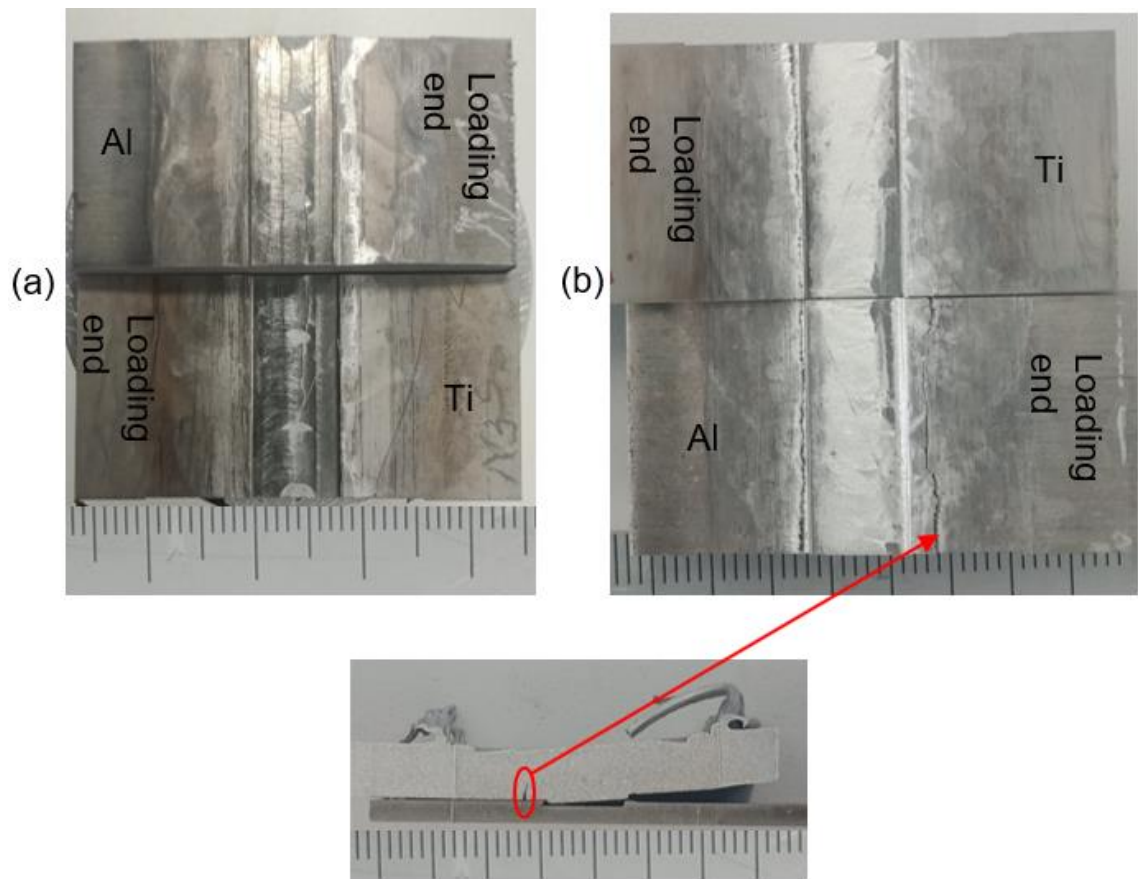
Al interlayer aided FSL weld fractured at the interface: (a) N3S6 approximately 10 per cent weld covered, (b) N2S5 approximately 90 per cent weld covered with crack initiation at the AA2024 loading end.
